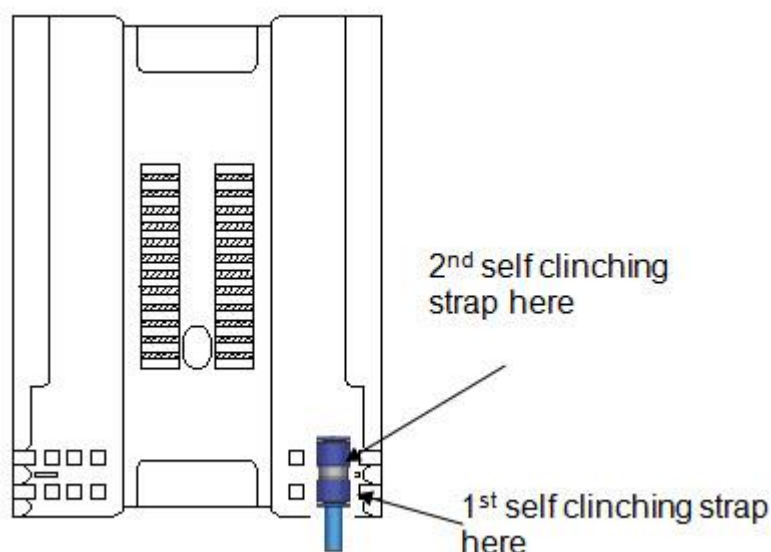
M1-13. Installation of 5-millimeter BOF straight tube coupler to tray.
